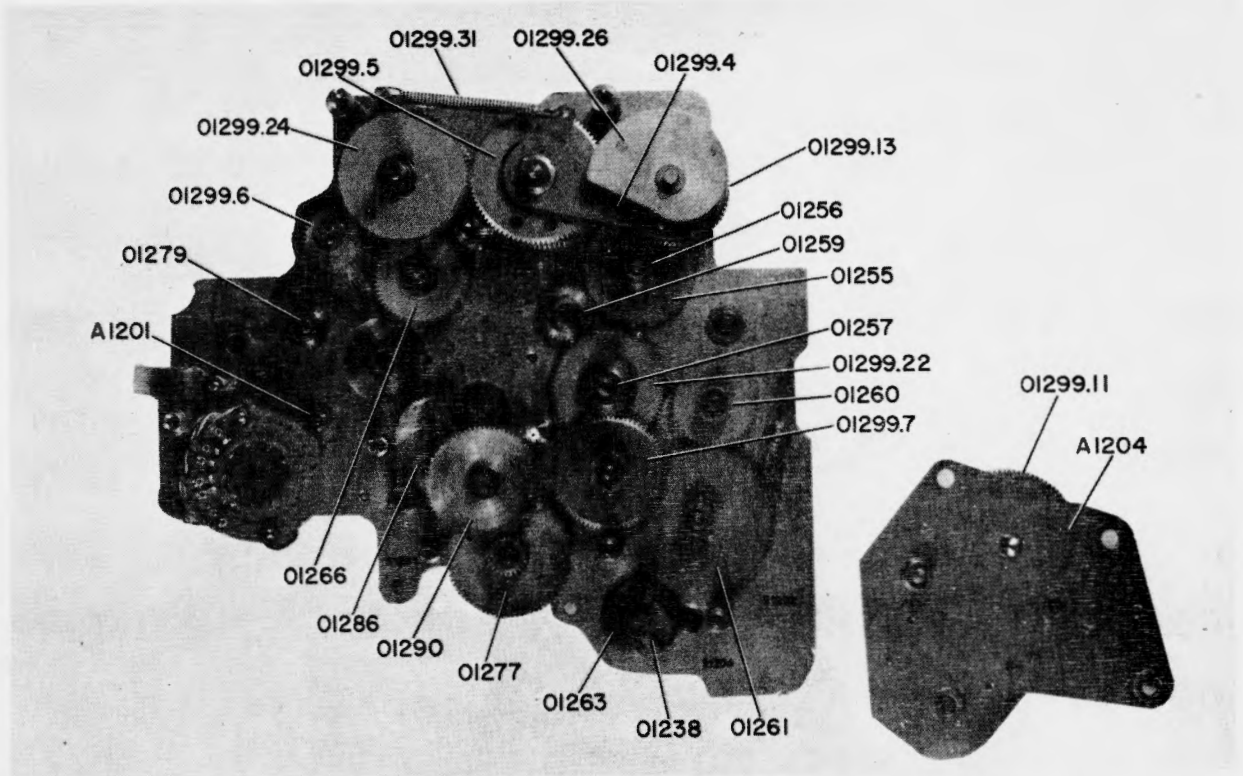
RT-581A/URC-9, Frequency Selector, Front View of Rear Plate, Small Gear Plate Removed
